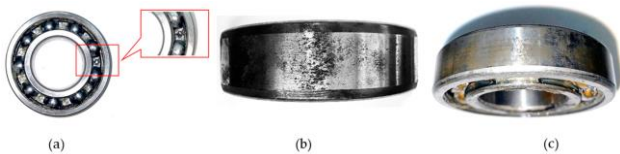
(a) Structure for ball bearings. (b) A flaw in the outer raceway. (c) A flaw in the inner raceway. [5]
